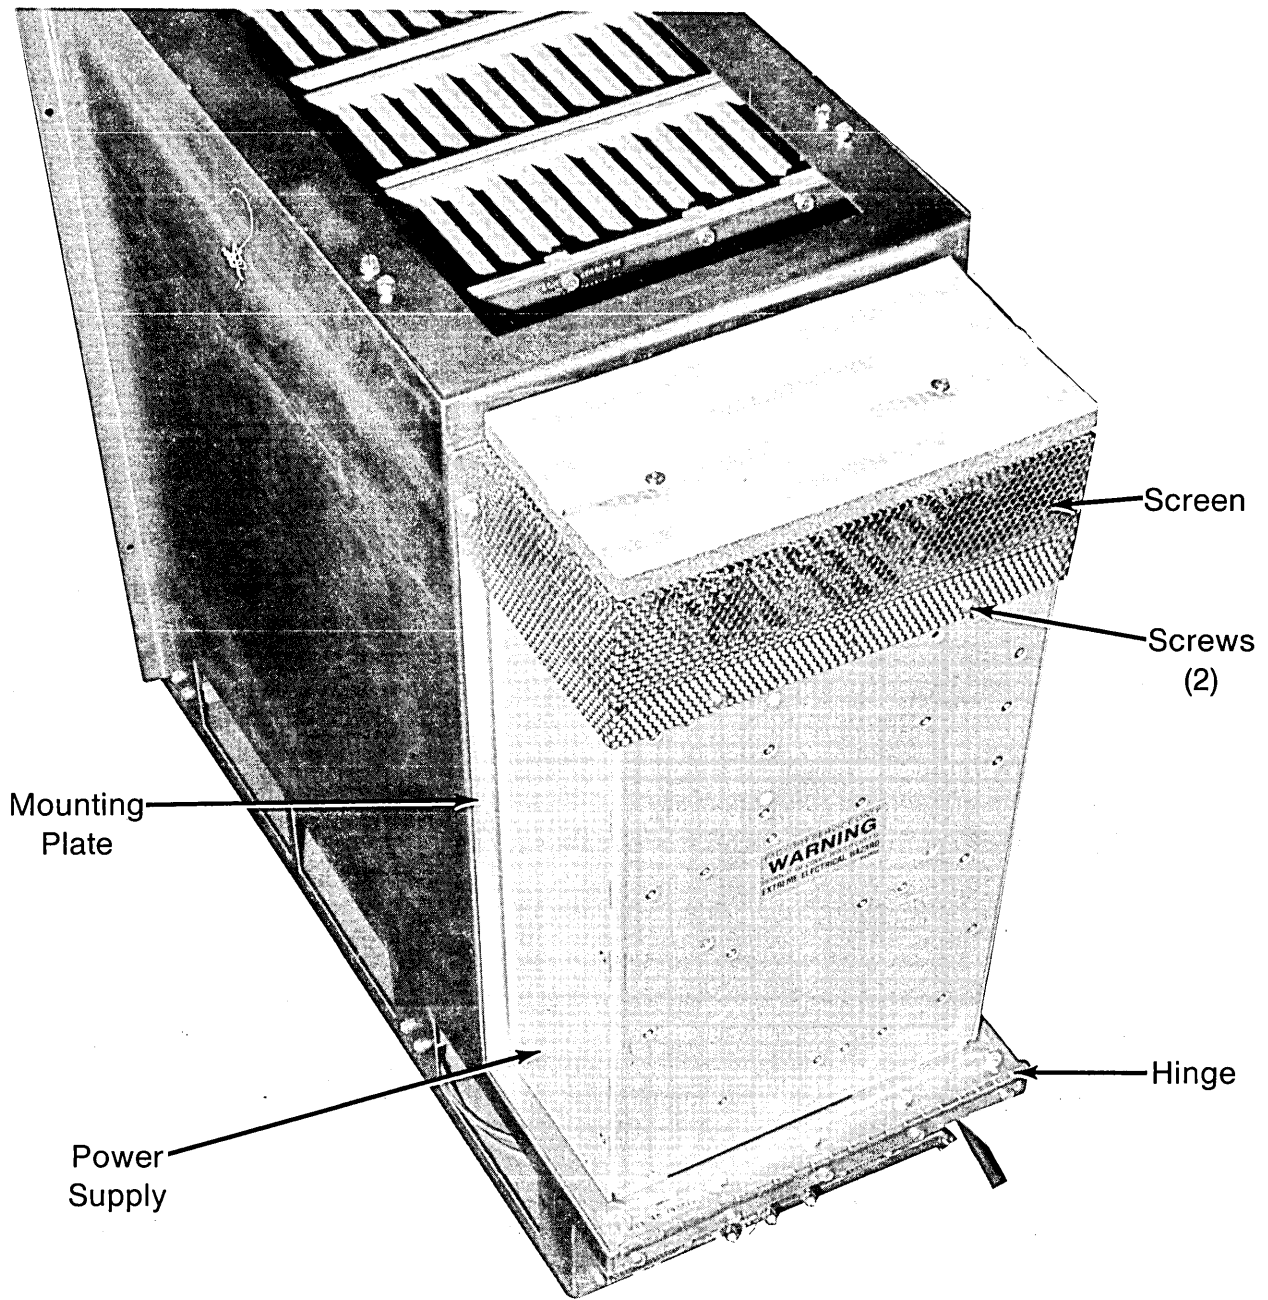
Power Supply on Rear of Display Generator Chassis
